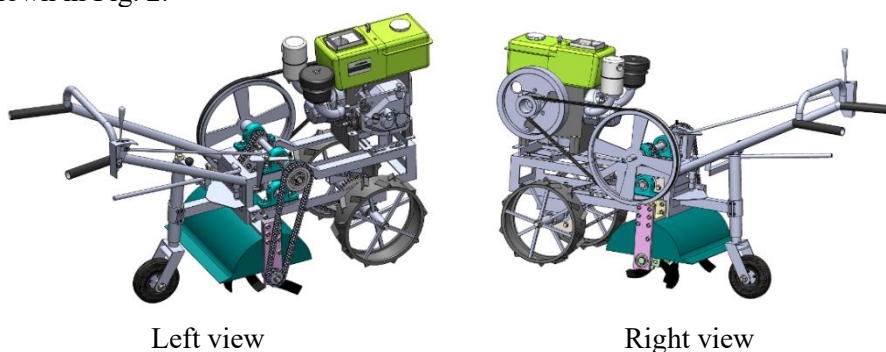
Isometric views of the orchard weeder cum mini tiller.
